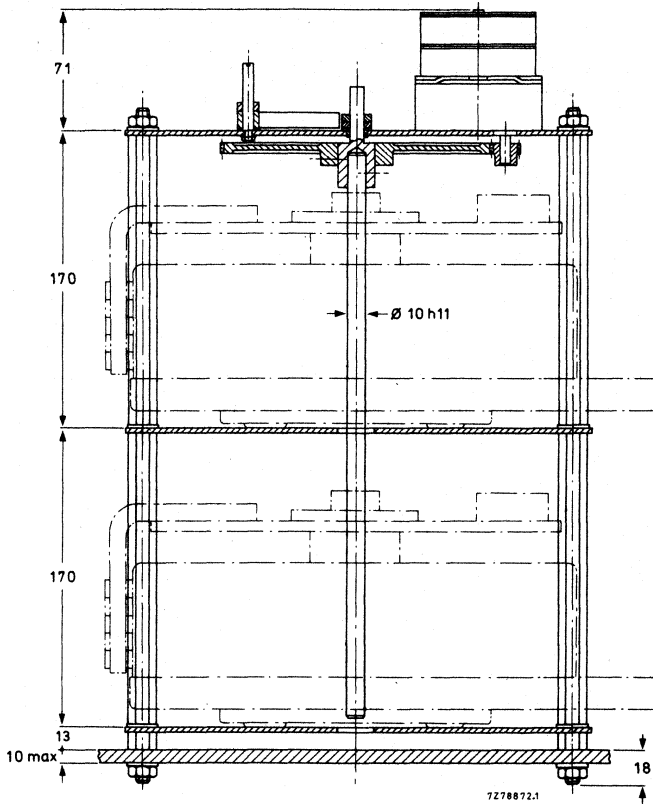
Motor drive for two ganged transformers. For connection of top-plate parts, see Fig. 27.
